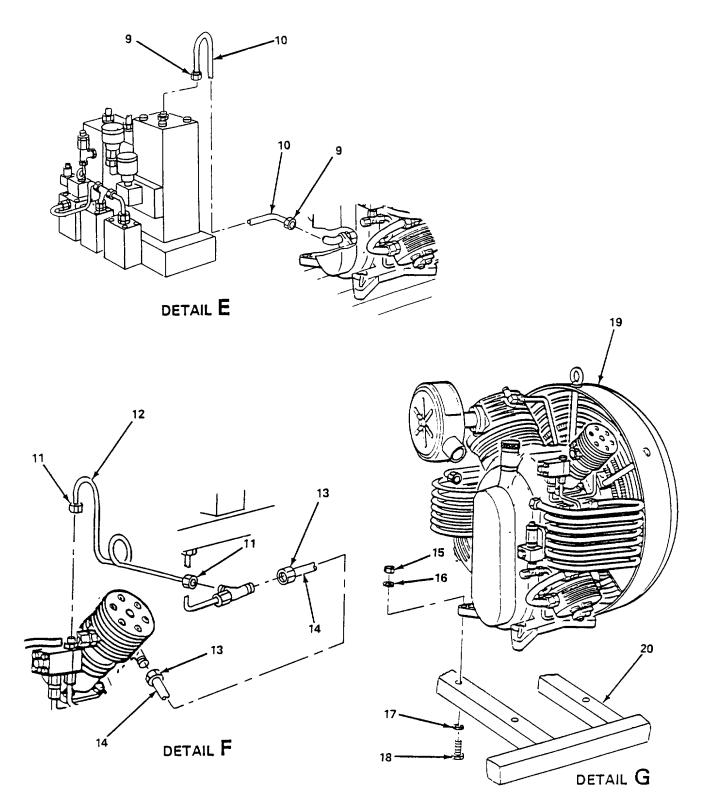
Compressor Assembly, Replace (Sheet 3 of 3).
